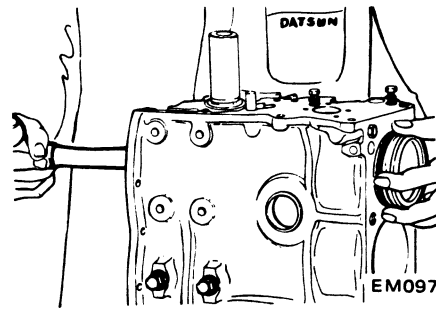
Removing Piston and Connecting Rod Assembly
